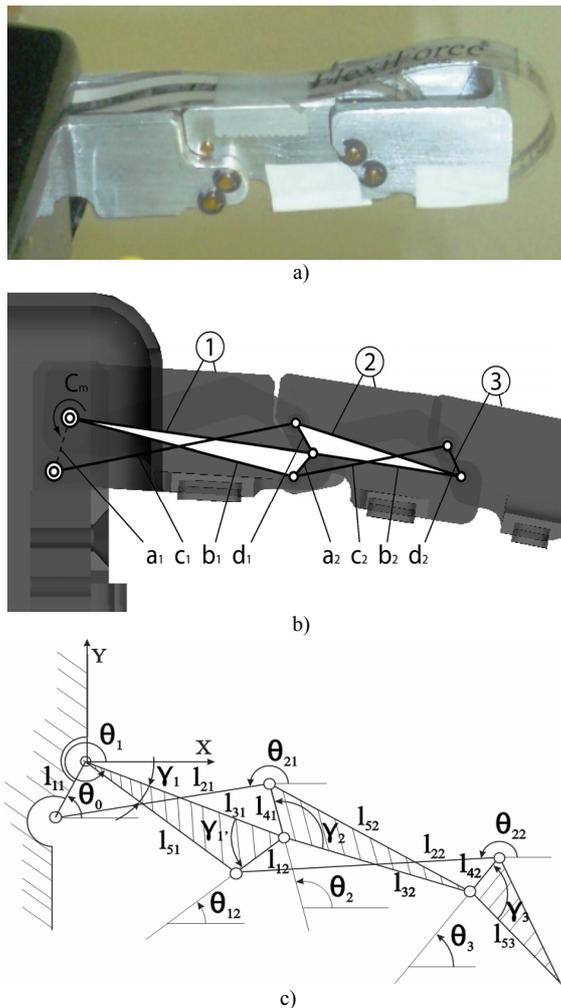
A finger of LARM Hand: a) a preliminar prototype at LARM; b) a 3D CAD model; c) a kinematic model for the driving mechanism .
